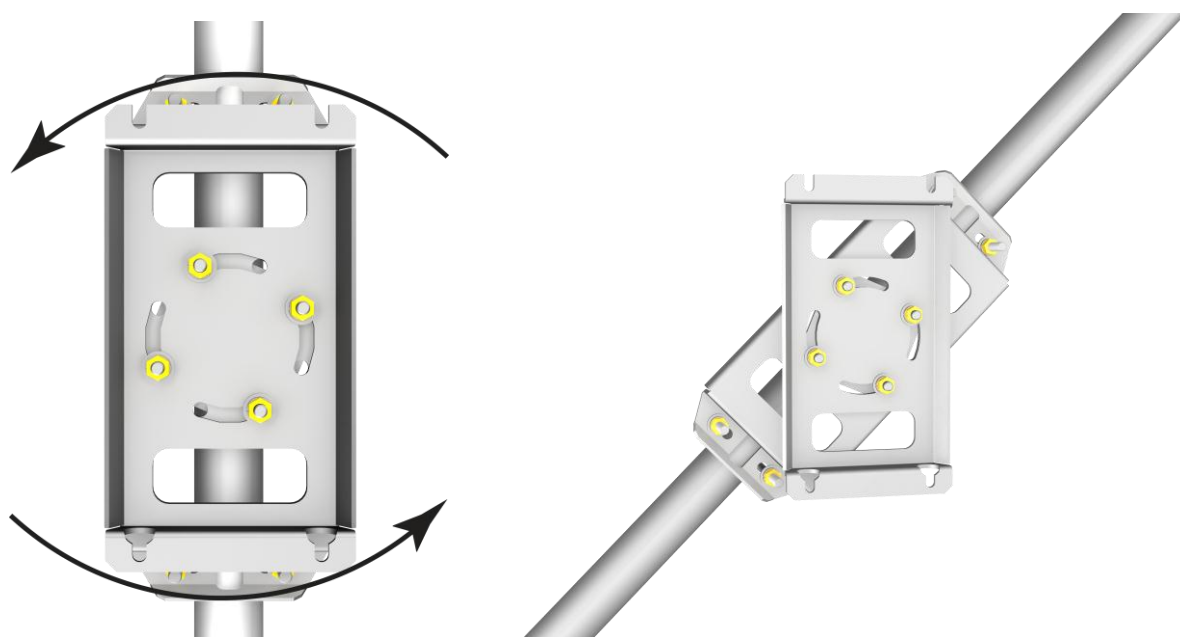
EC100 enclosure mounting bracket mounted on a vertical mast (left) and a tripod leg (right)
